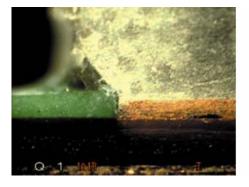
Cross-sectional view of land with solder ball joint illustrating the solder wetting down the edge of the land with solder mask relief away from the land edge
